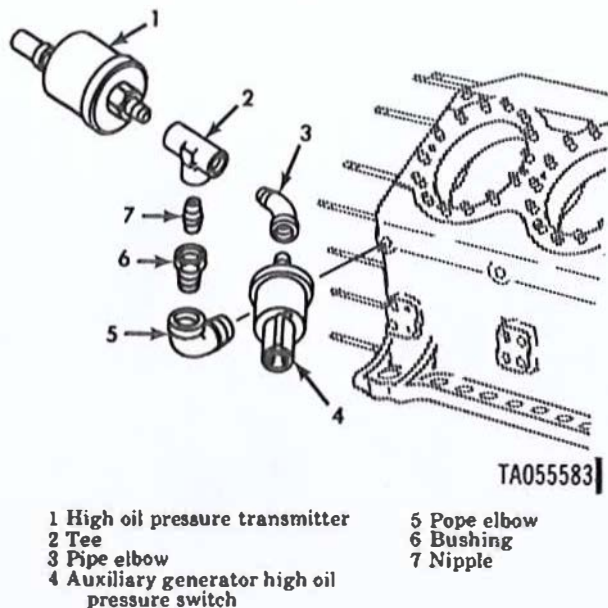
Pressure transmitter and pressure switch - exploded view, model AVDS-1790-2DR engine.
